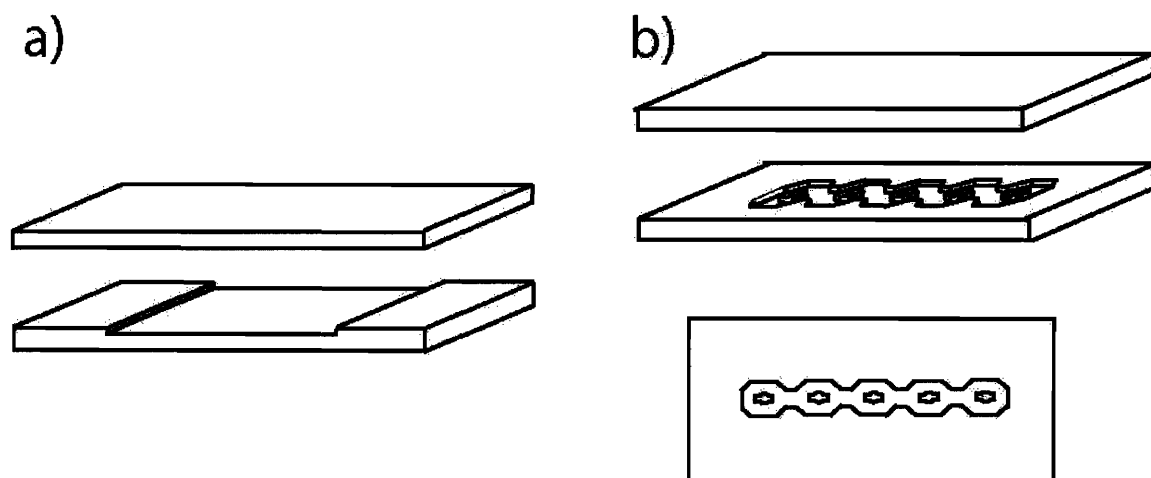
Aluminum plate molds for a) films and b) a custom shape.
